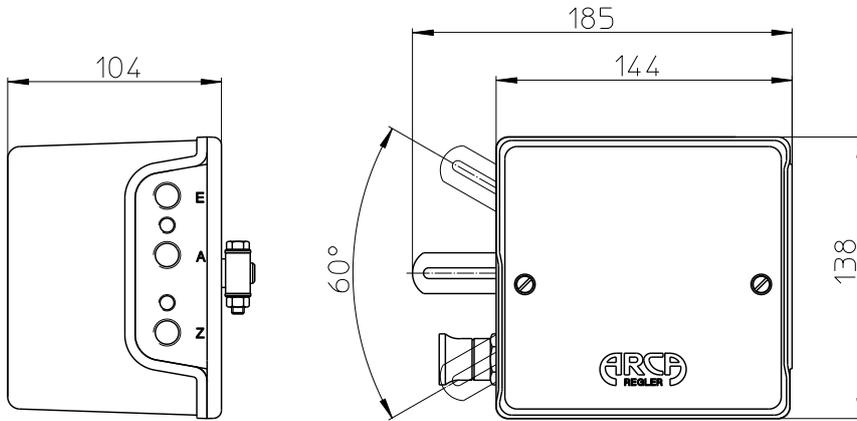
Dimensional drawing basic device type 824.P and 824.E
